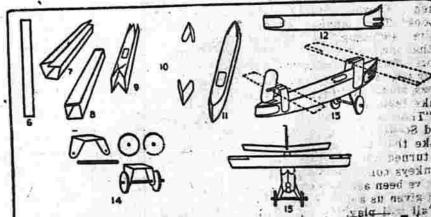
is the cardboard when folded. Figure 7 is the cardboard ready for pasting. Figure & after pasting. Figure 9, the ends and cockpit. Figure 10, paper for the ends. Figures 11 and 12, the fuselage. Figure 13, the supports and rudder in position. Figure 14, the chassis with match for axle. Figure 15 shows the
